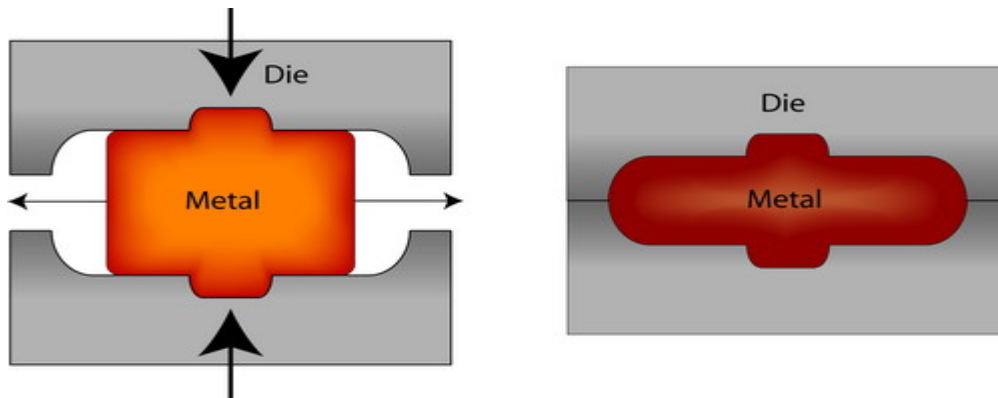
A schematic of a closed die forging process, used to form specific shapes⁷
